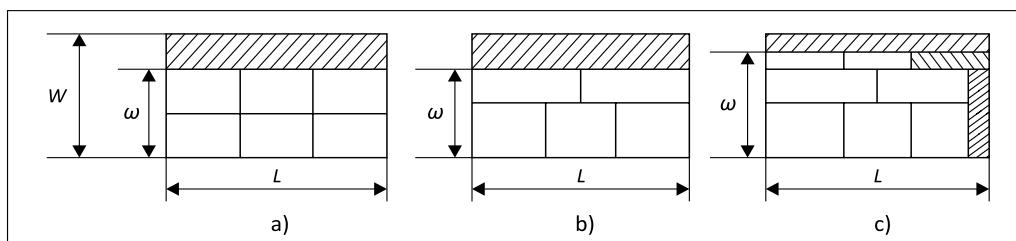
Construction of assembled workpieces; ω – workpiece width, l – workpiece length
